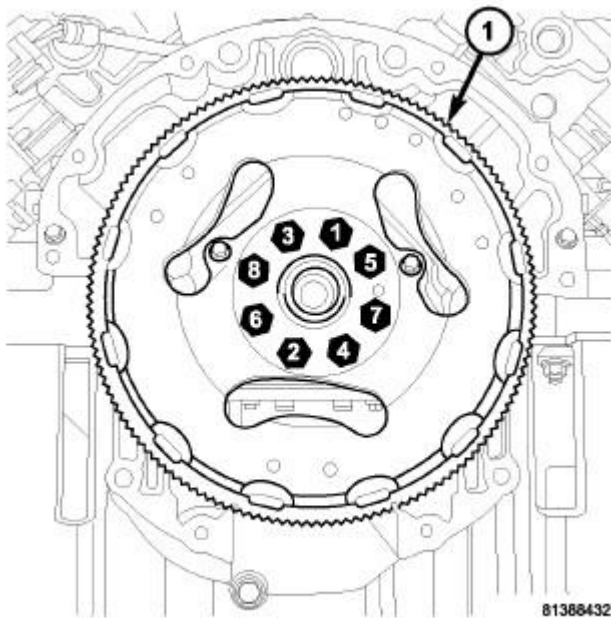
FLEX PLATE TIGHTENING SEQUENCE
